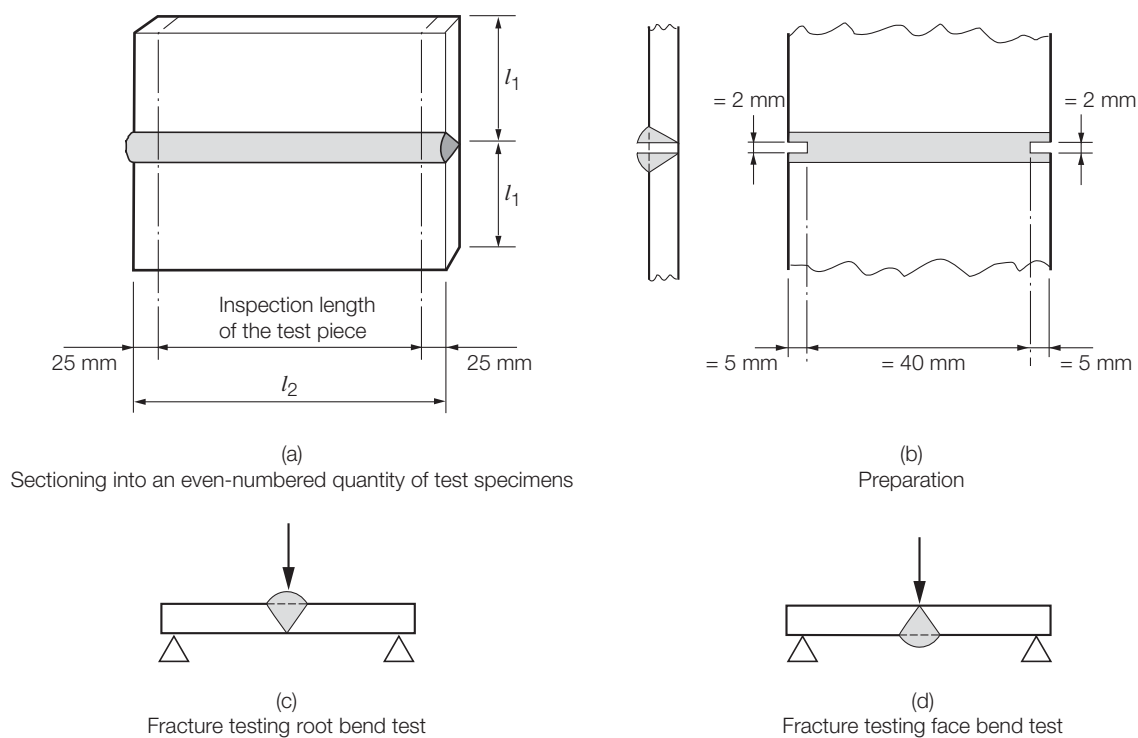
(b) Preparation and fracture testing of test specimens for a butt weld in plate
